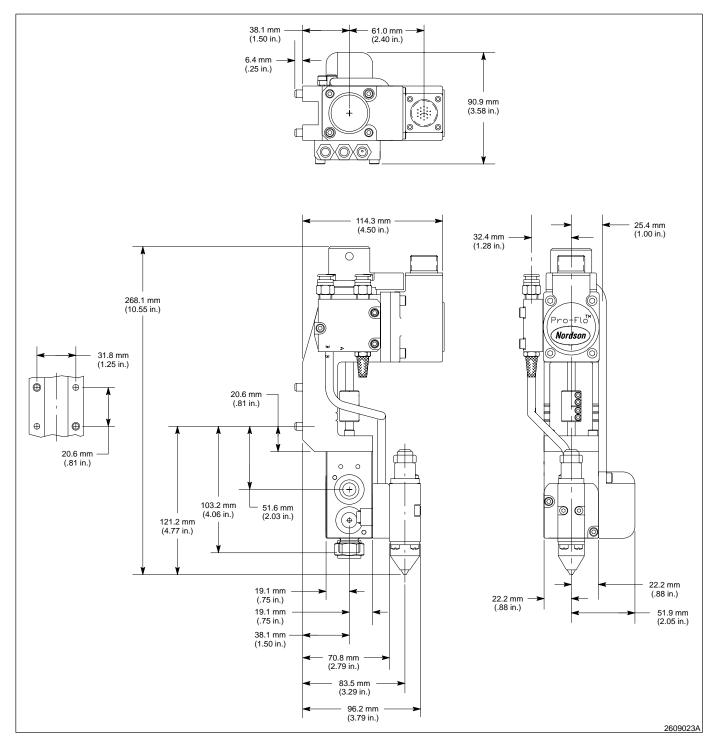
Pro-Flo II Extrude Dispensing Gun with Optional Short Nozzle
